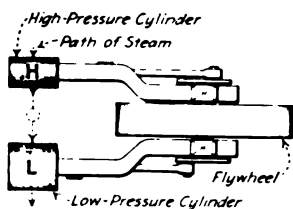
Diagrammatic plan view of a cross-compound engine.
